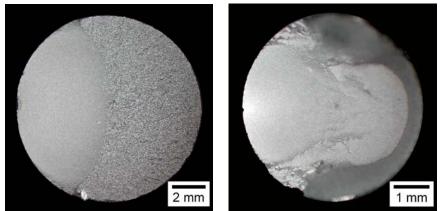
Fracture surface in the specimens after the Whöler tests: hot rolled bar (left) and prestressing steel wire (right). In both images the fatigue crack growth direction is from left to right
